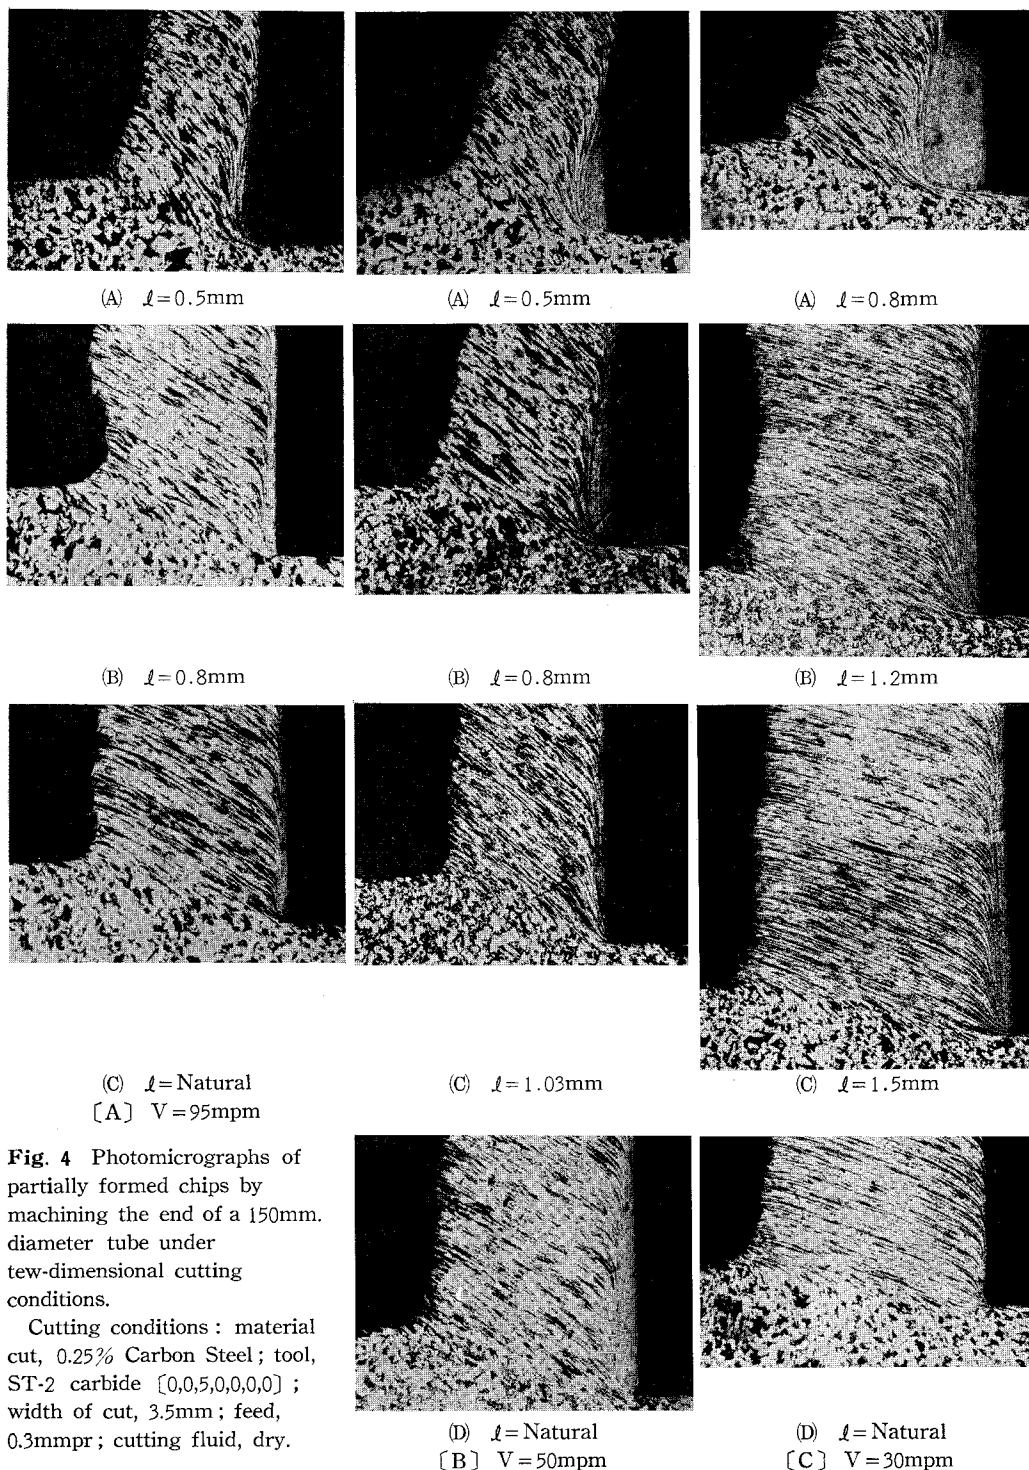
Photomicrographs of partially formed chips by machining the end of a 150mm. diameter tube under two-dimensional cutting conditions.
